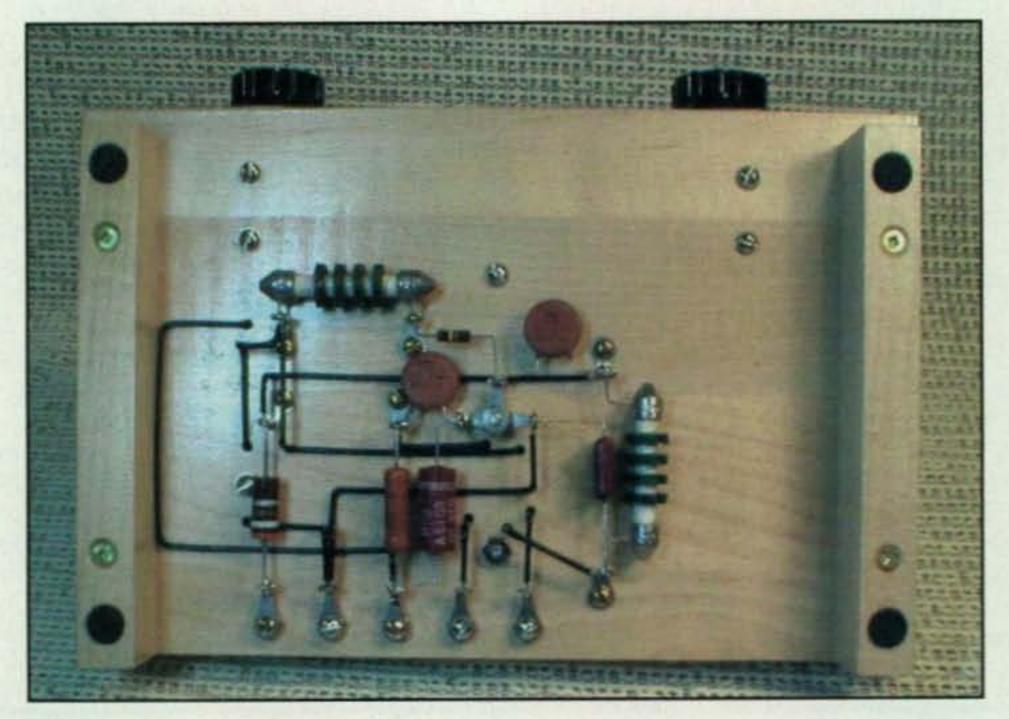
Photo B-Underside/wiring view of the VE3AWA 6L6 transmitter reveals perfectly formed wires and well-planned parts layout. Note the tube, coil form, etc., are mounted completely above the board and interconnecting wires route through small holes to below the board-mounted components.
